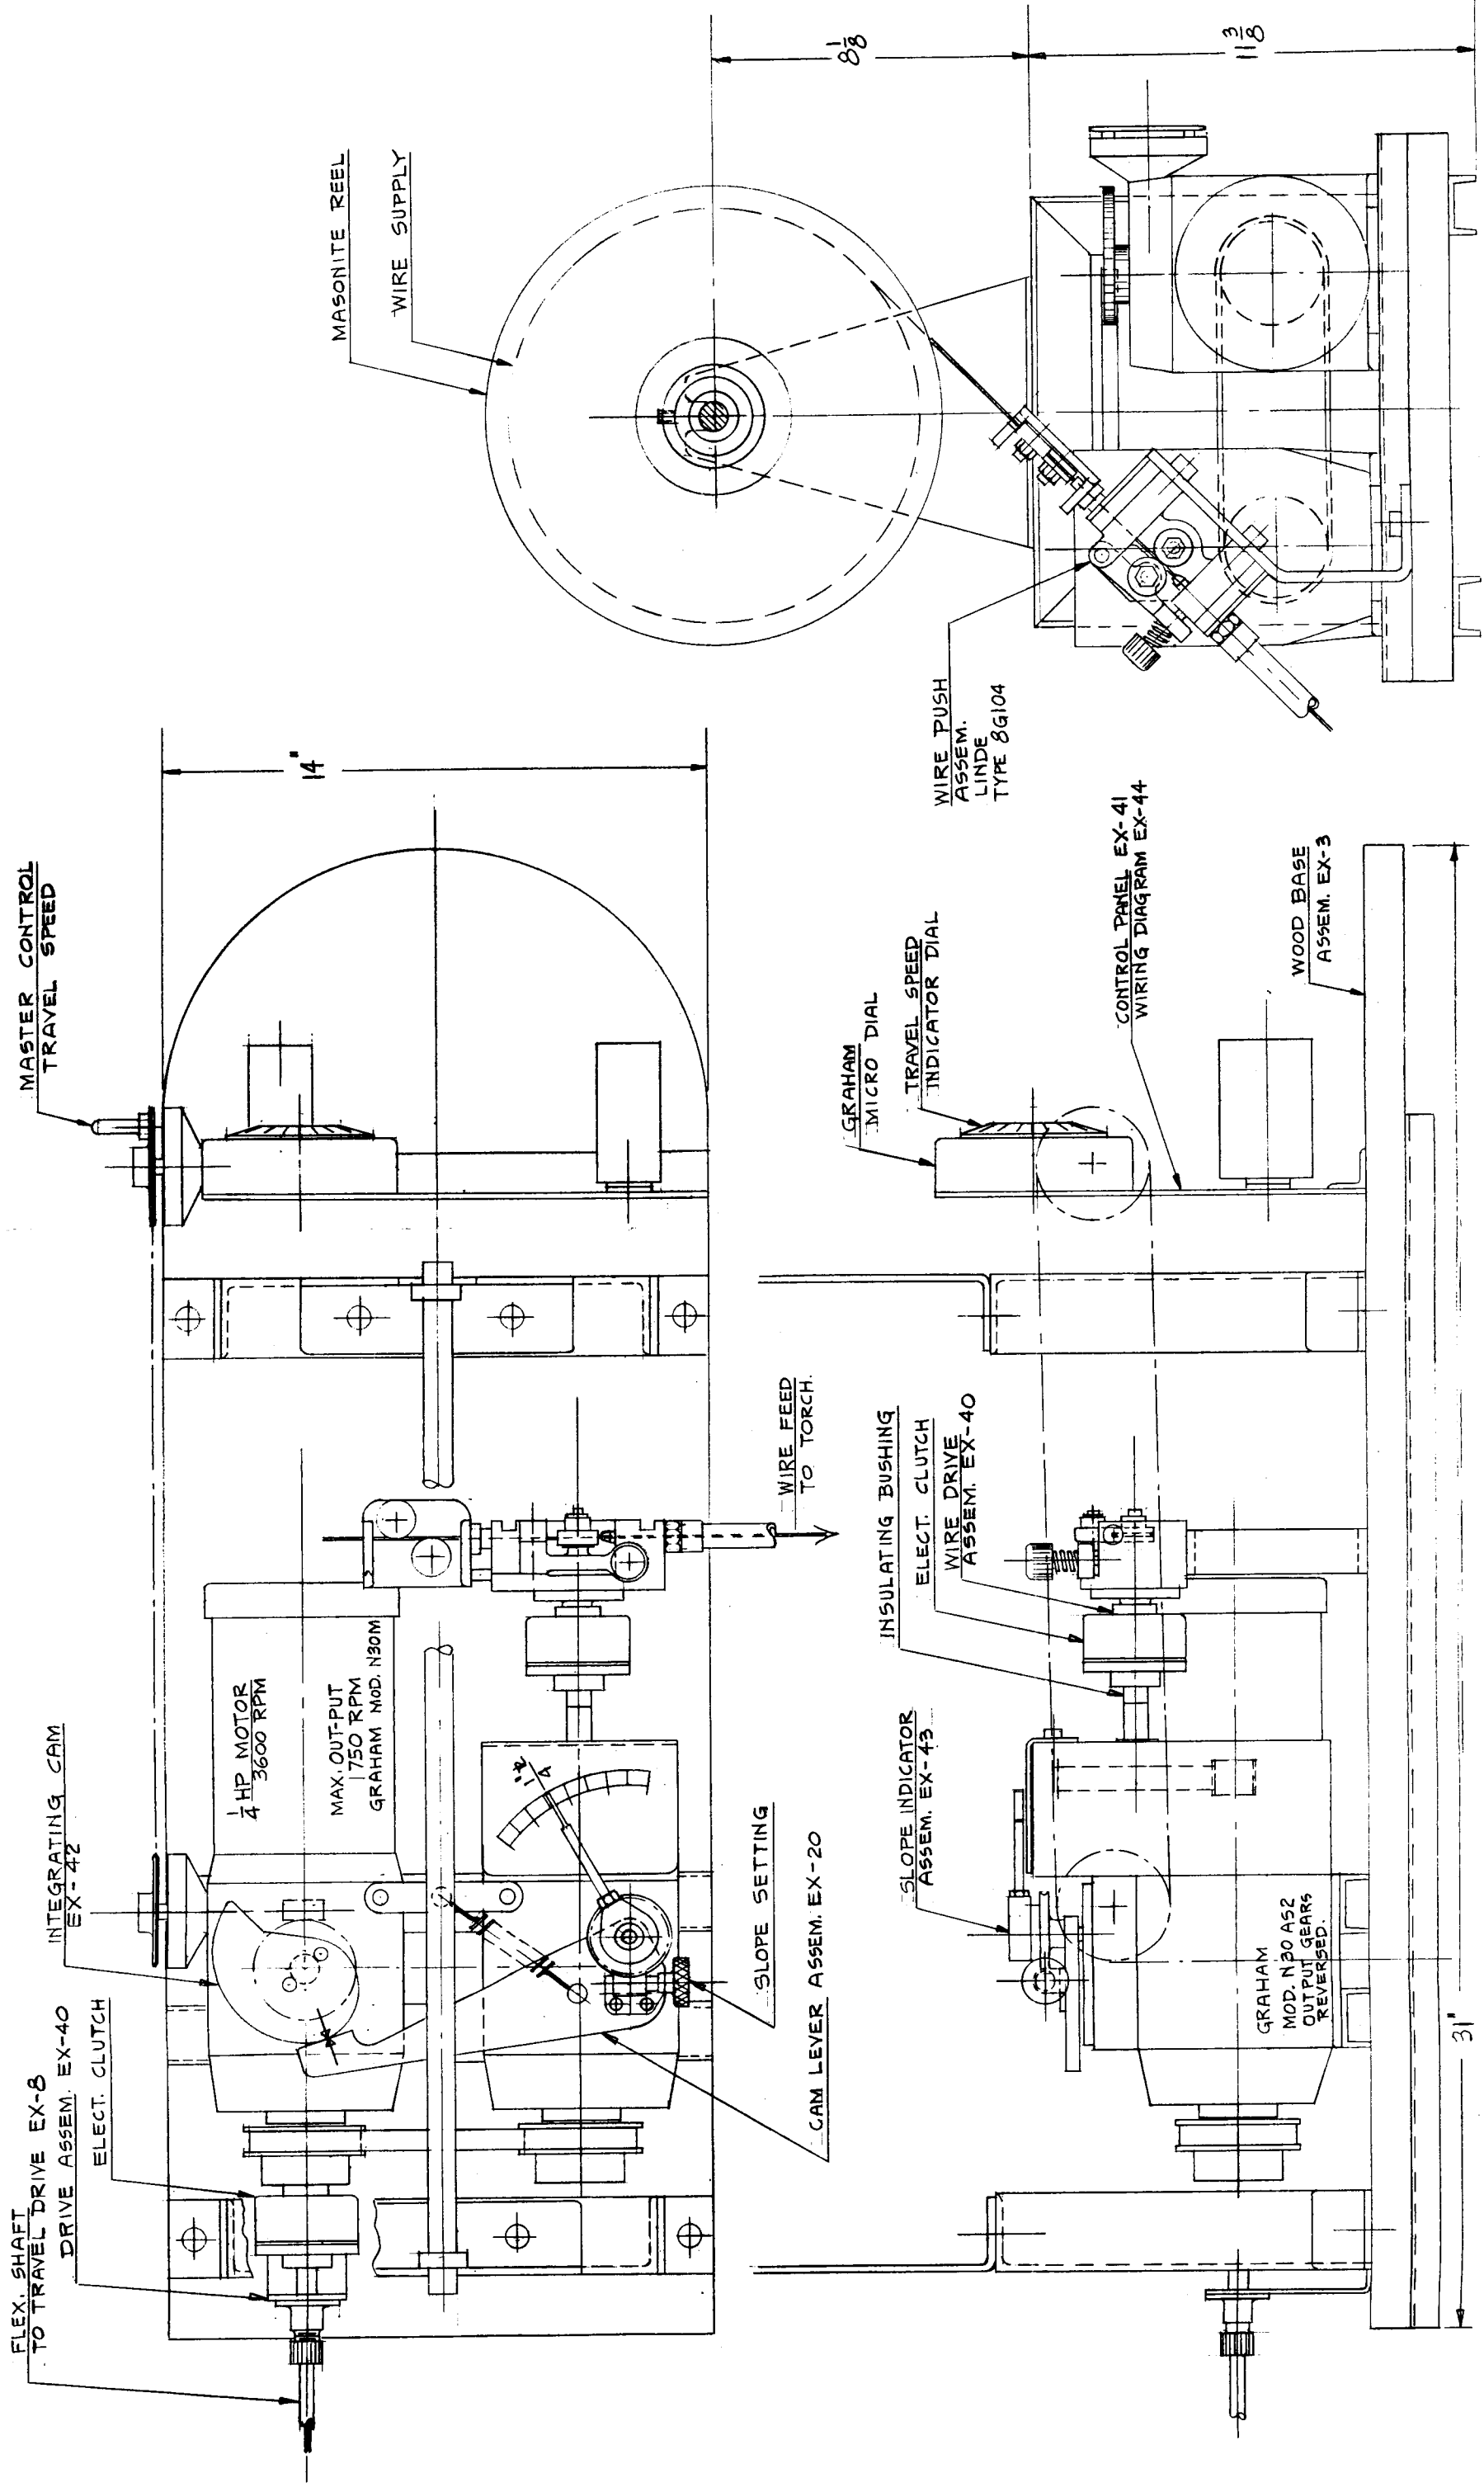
Drive System Integrated Welding Controls Wire Feed-Travel Speed
